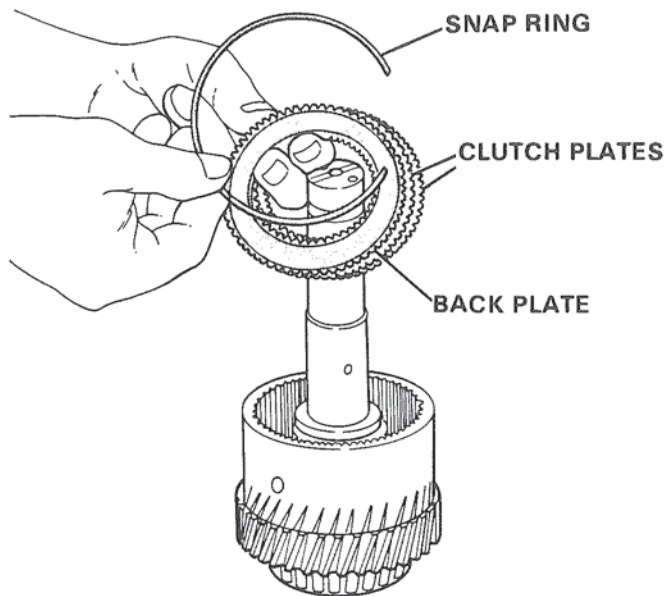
Removing Snap Ring, Back Plate, and Clutch Plates.
